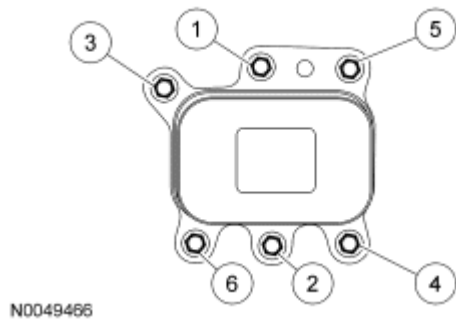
Installing Oil Cooler Bolts Tightening Sequence
